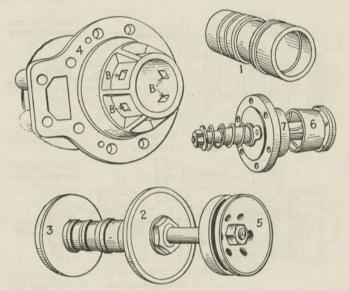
Intercepting Valve Parts, Articulated Compound Engine.
